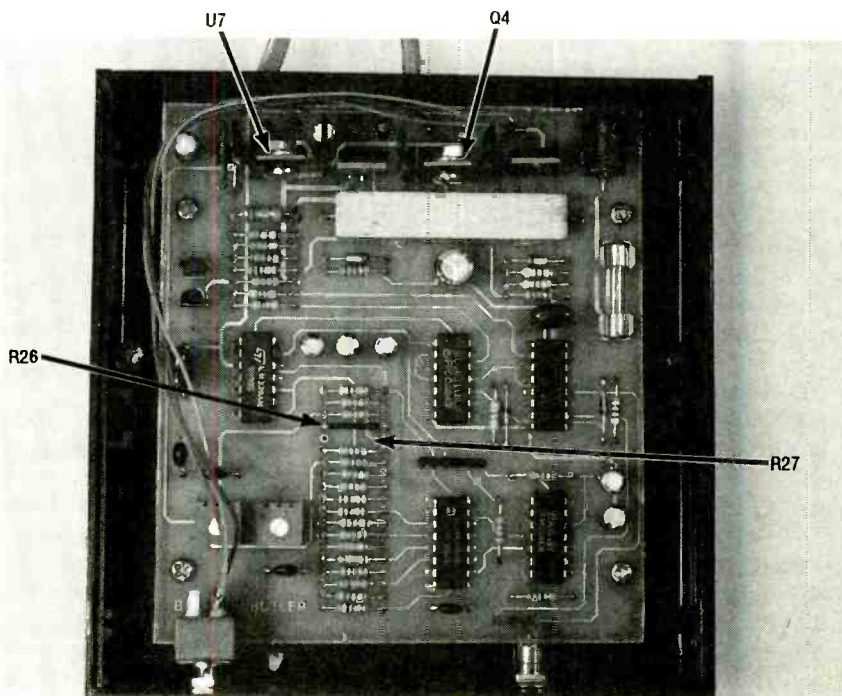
The author's prototype of the Battery-Butler was assembled on a double-sided, printed-circuit board, measuring about 4 by 4½ inches. The foil pattern for copper side of the board is shown here full-scale.
